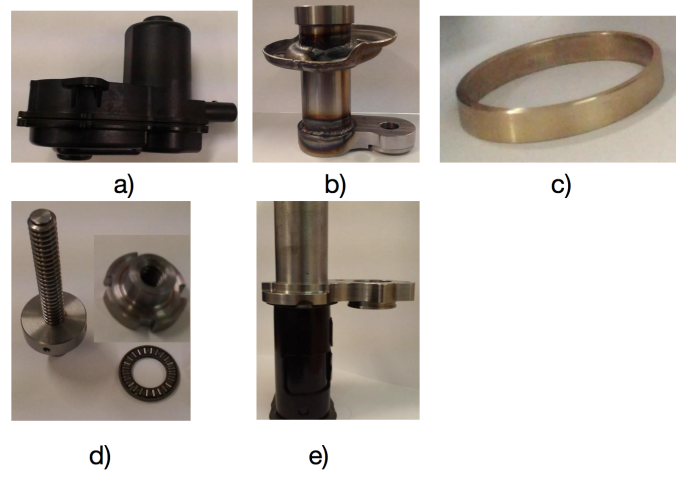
Components view: a) TRW actuator. b) Integrated spring holder, upper arm and sliding element. c) Bronze bushing. d) Power screw, nut and axial bearing. e) Lower arm.
